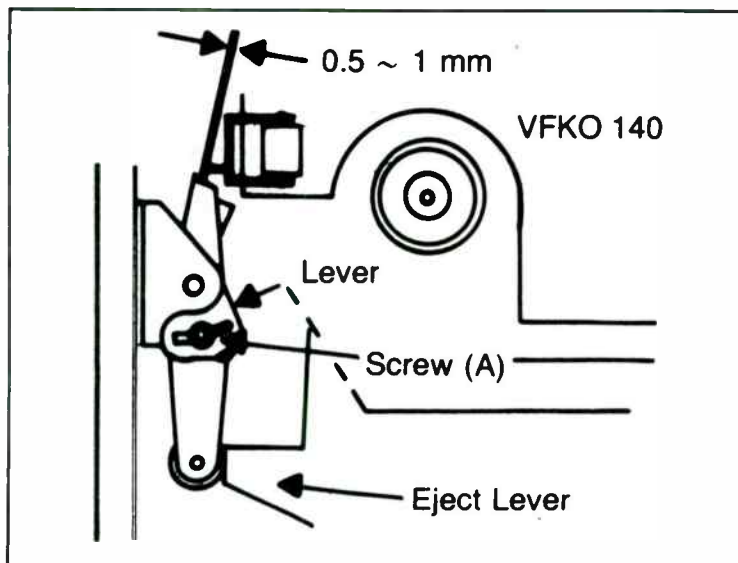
Eject link clearance adjustment (courtesy of Magnavox).
